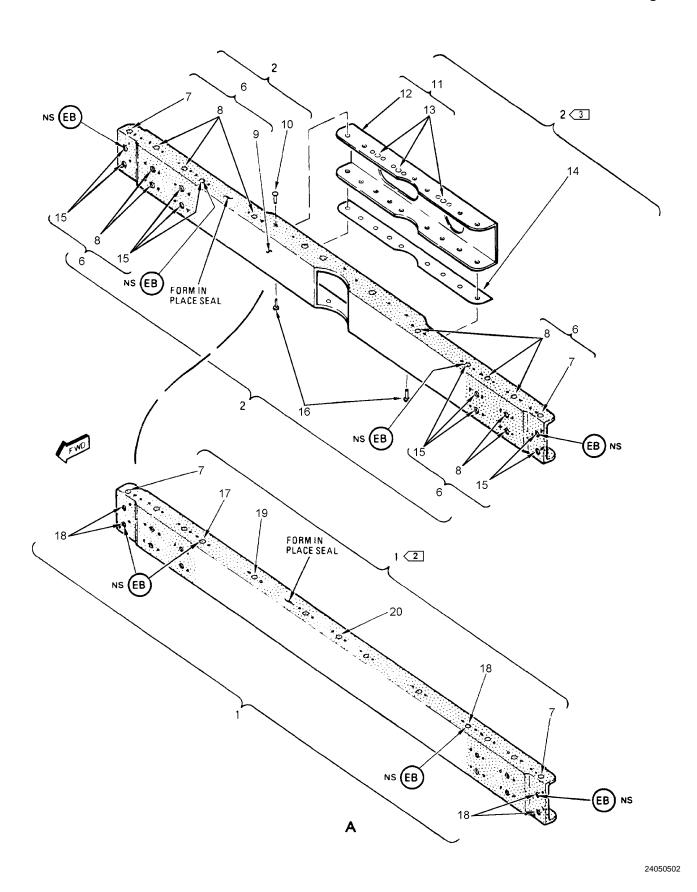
Upper and Lower Support Assemblies (Sheet 2)
